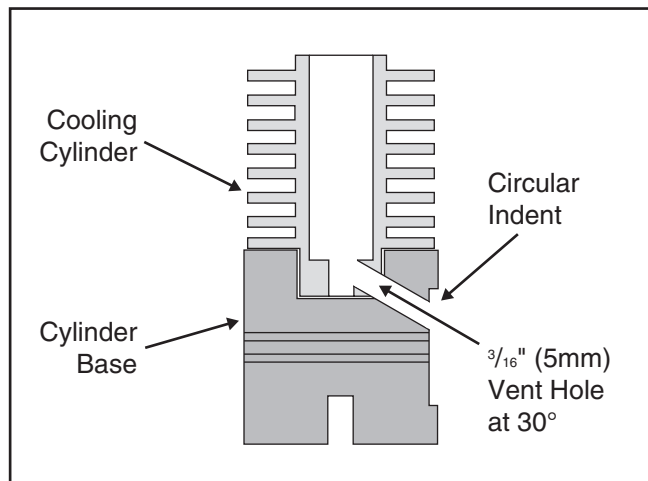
Cooling cylinder and base assembly showing location of 30° vent hole.
